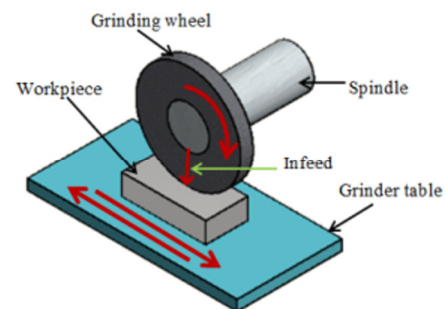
The principle of SG process with the key components including grinder table, grinding spindle, grinding wheel, and workpiece.
